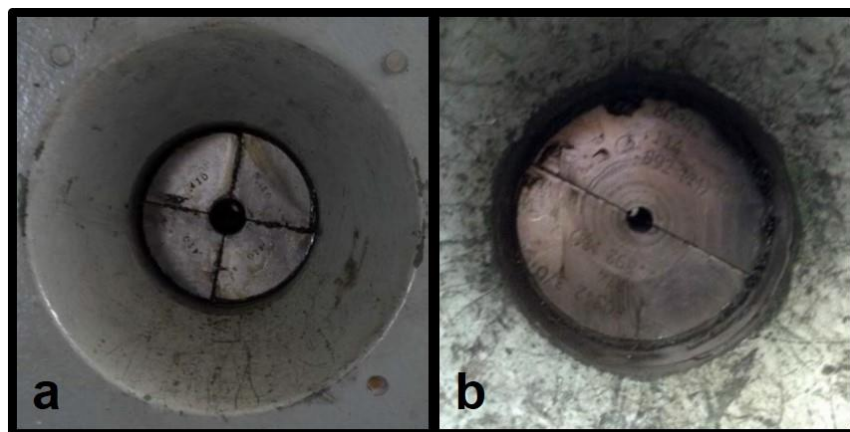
Equipment: a) 4 hammers and b) 2 hammers, used to rotary forging steps
